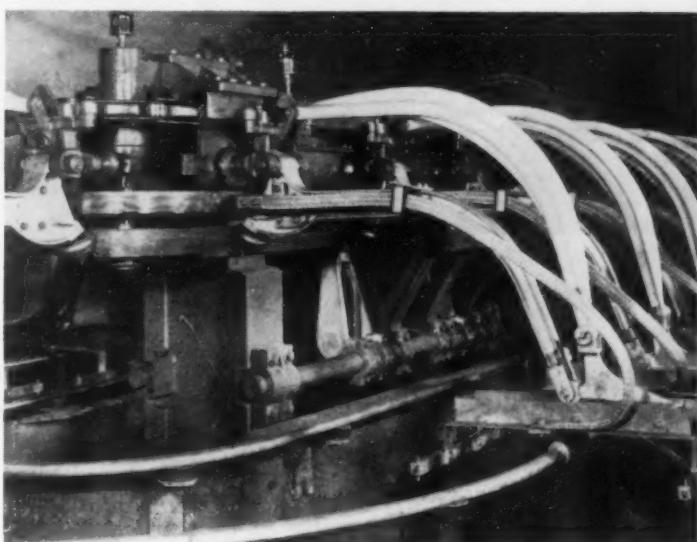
Rack-type full-automatic machine showing view of carrier arms, heavy-duty contact shoe and insulated cross arms. Courtesy of Frederic B. Stevens, Inc.
